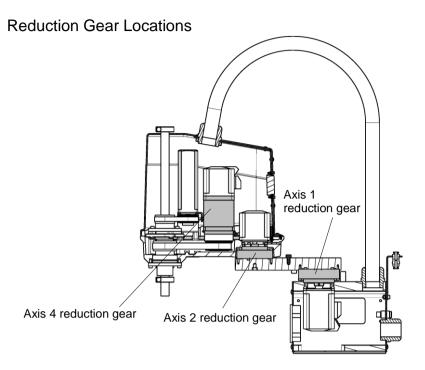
Reduction gear locations (KHL-300, KHL-400)
